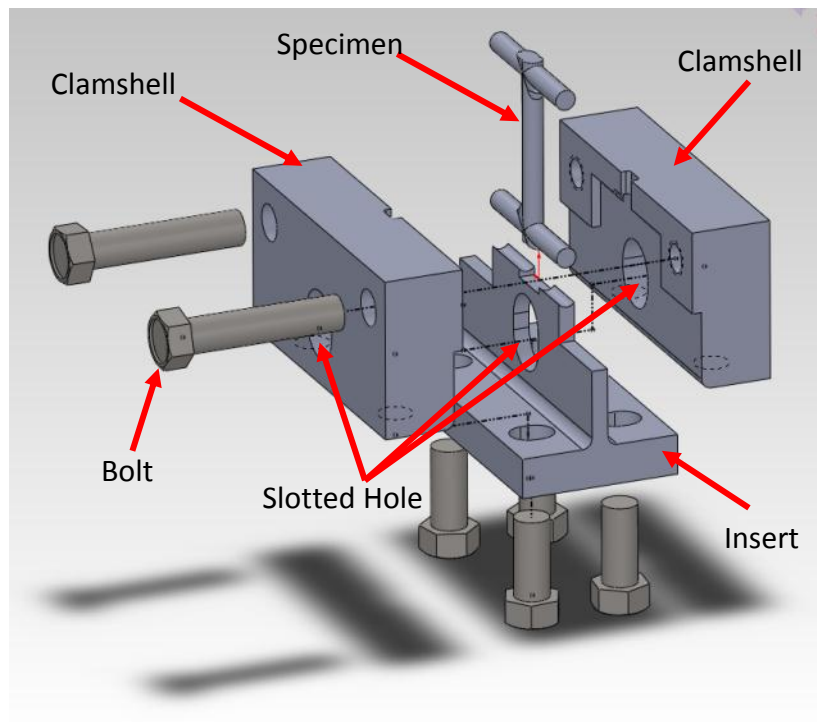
3D Exploded Model of Transverse Specimen Fixture
